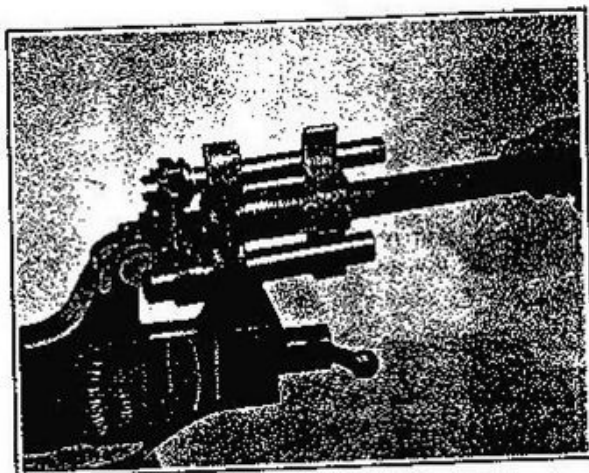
F-62. Bending Fork Stem and Bracket Assembly
